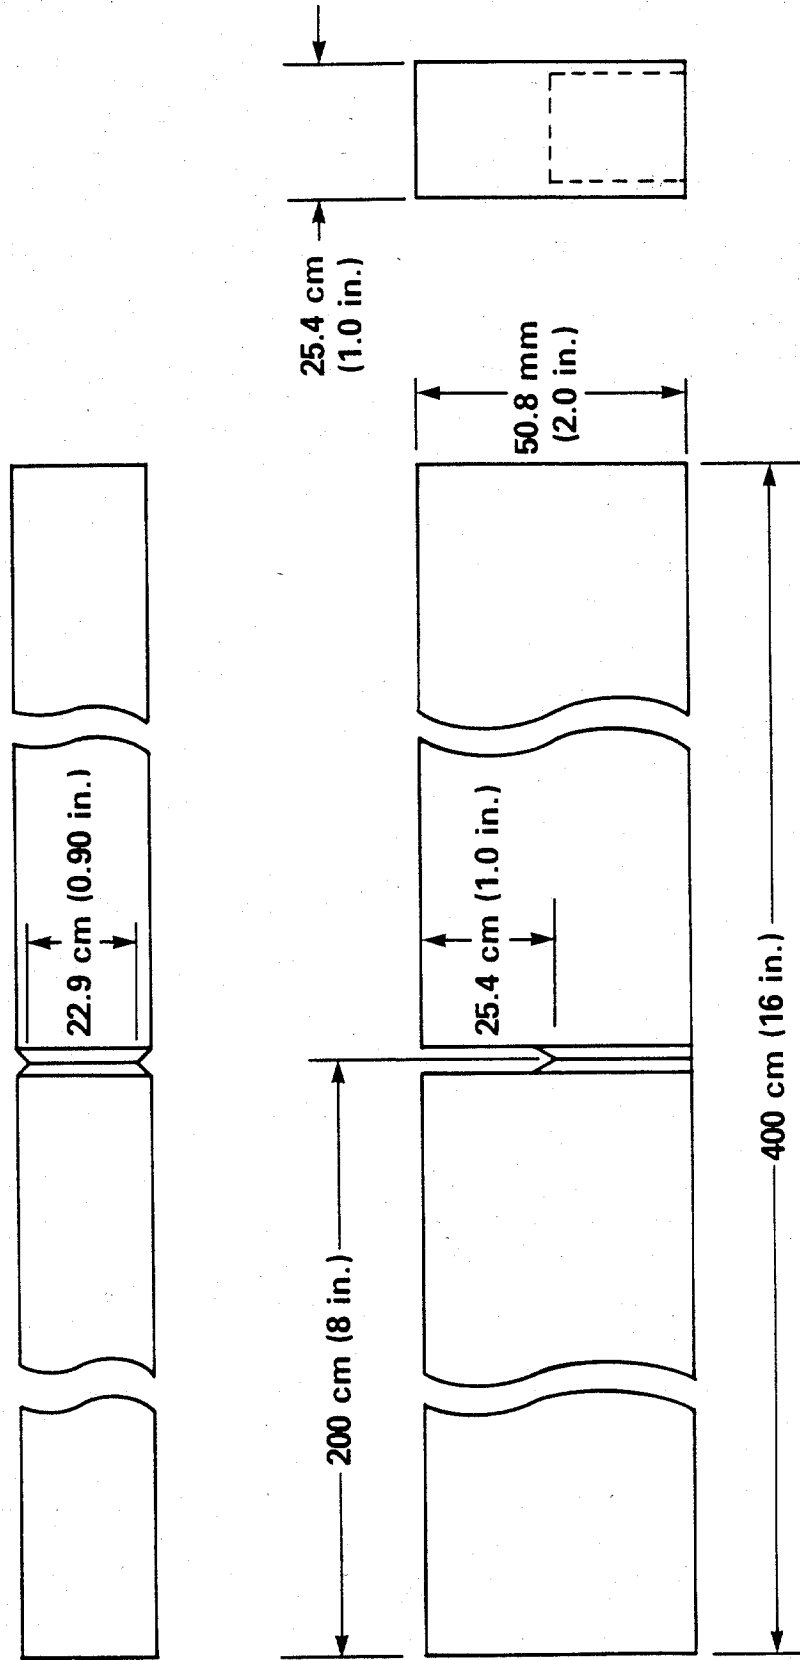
Details of the precracked cantilever-bend (CB) stress-corrosion cracking test specimen.
